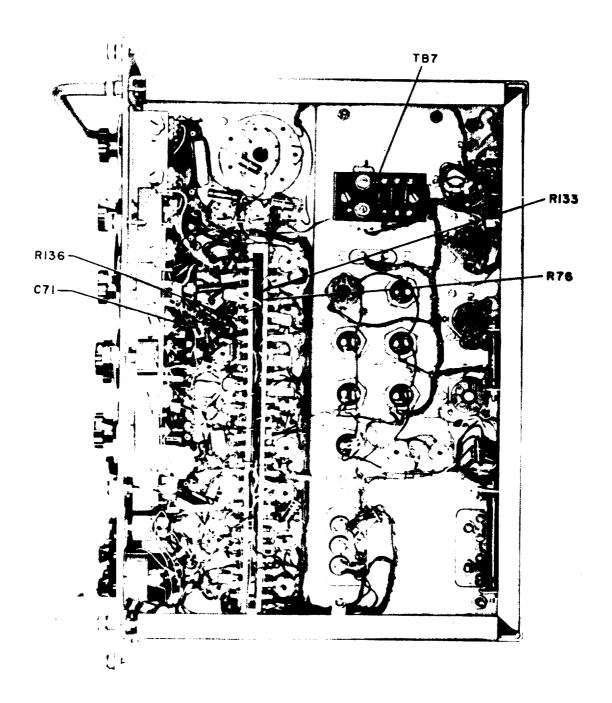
A. Chassis, Bottom View TS-592B/UPM-15
